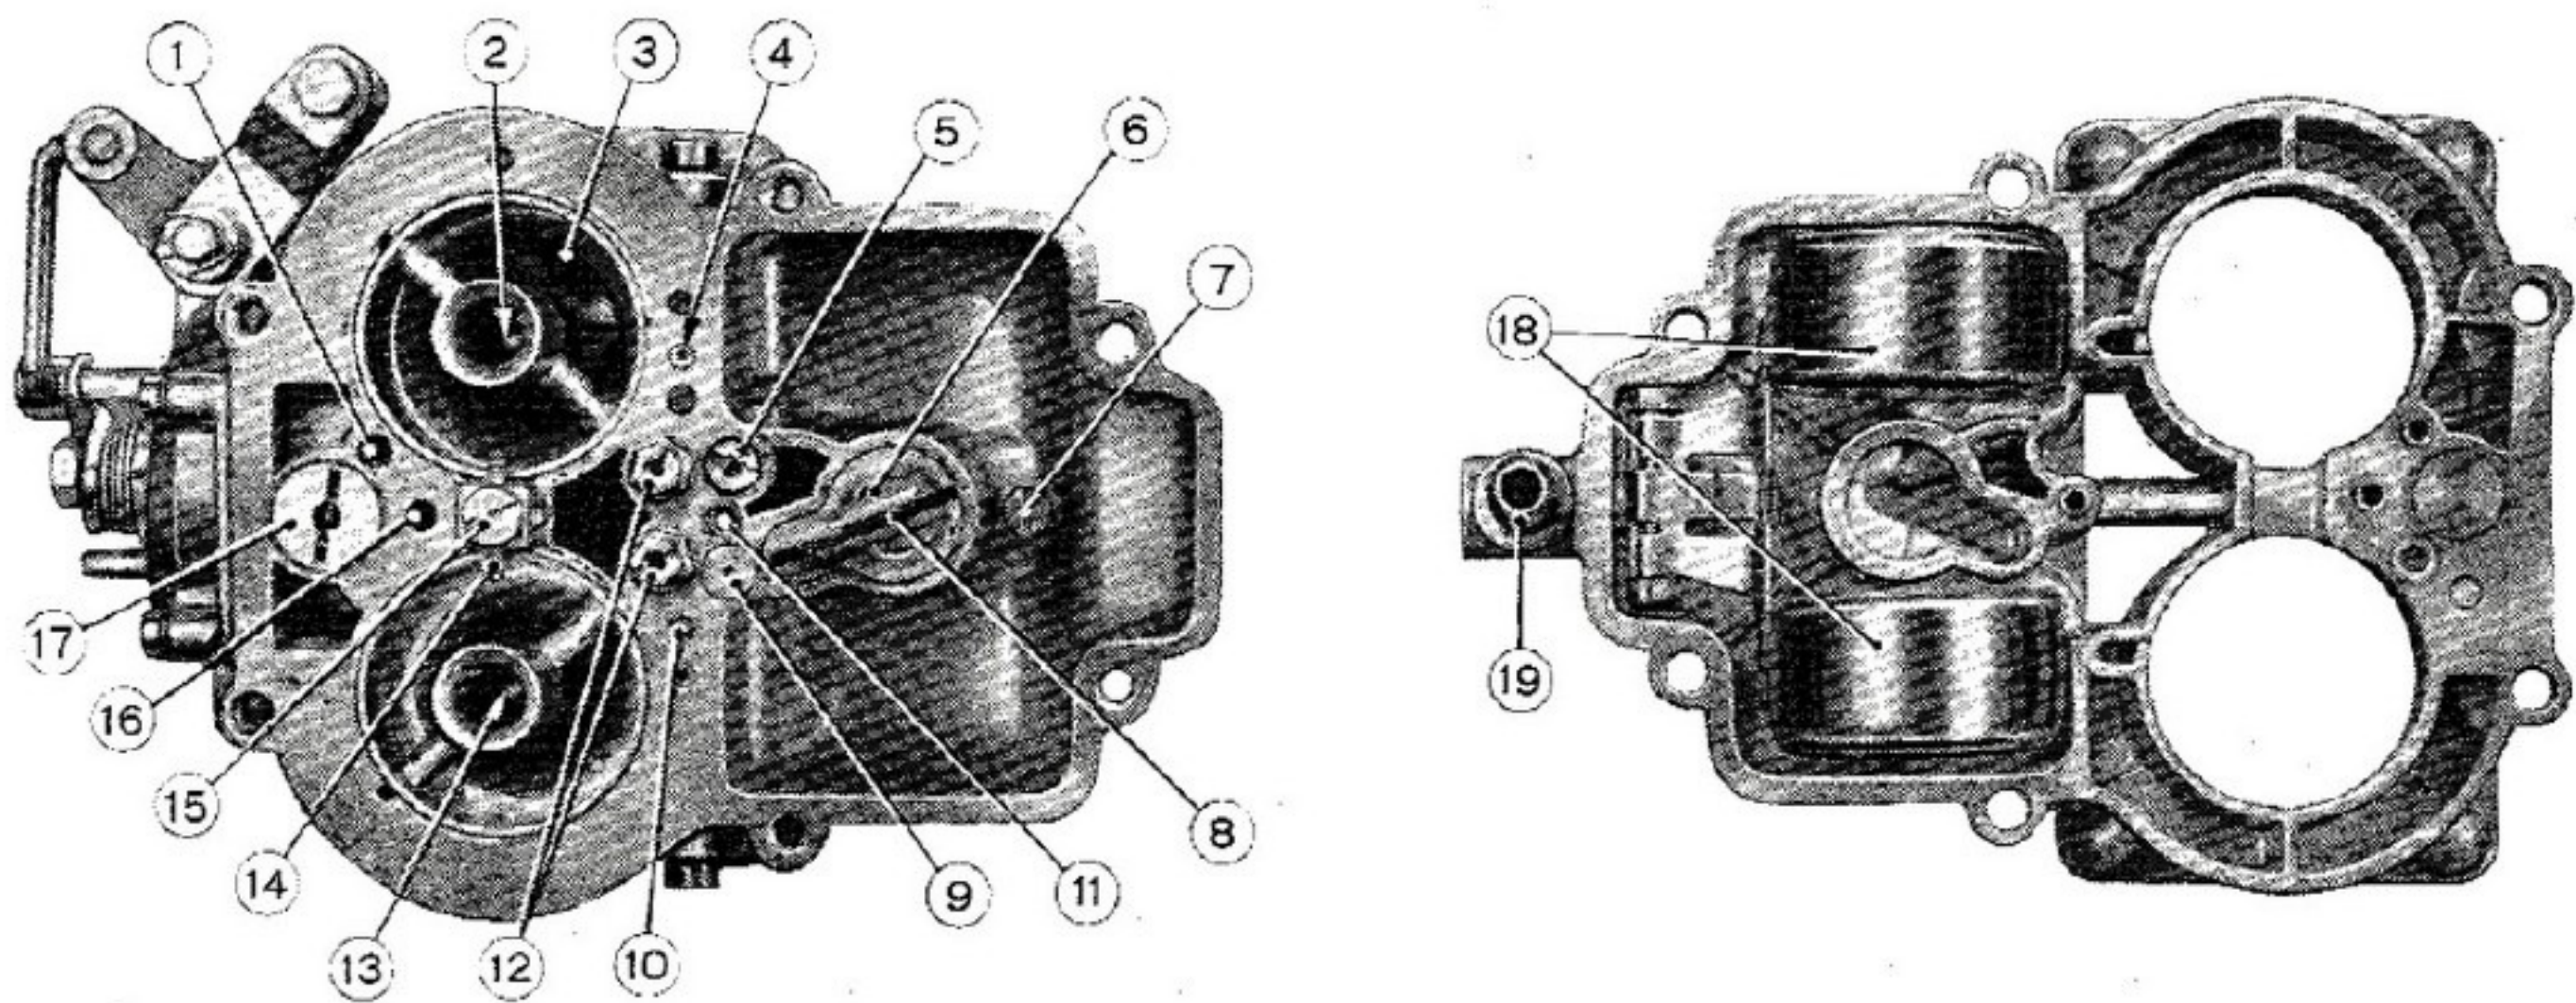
Carburetor top view (left) and cover with floats (right).
